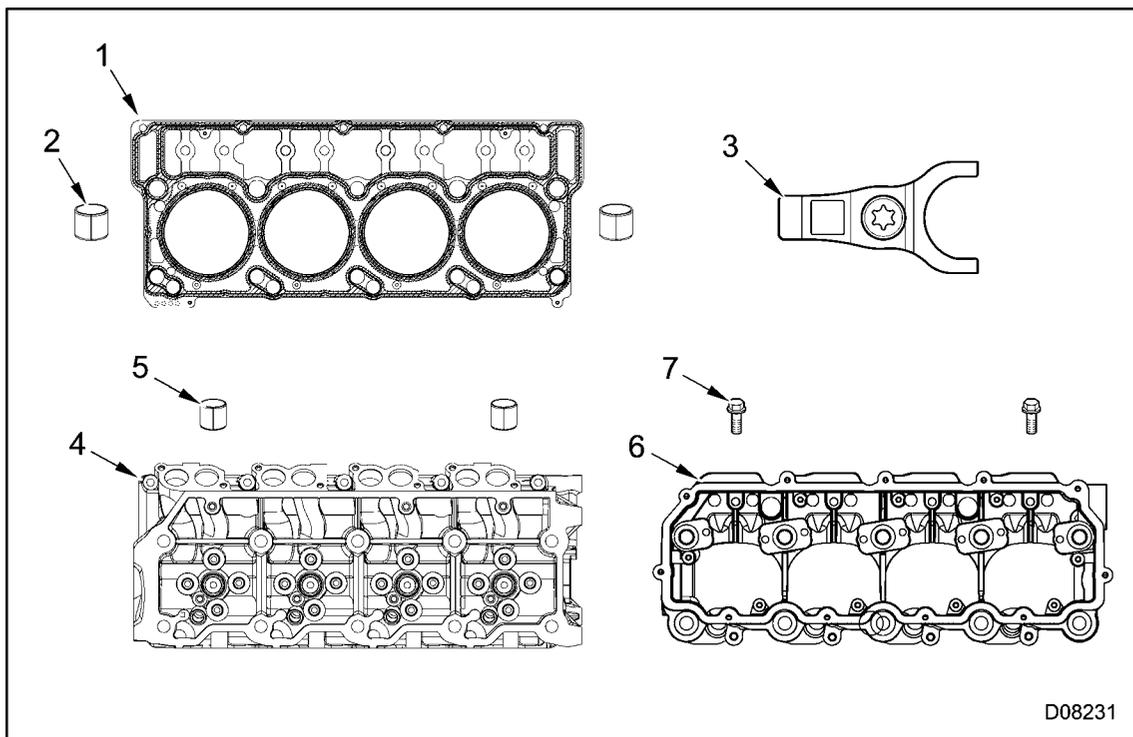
2005 Model Year (two M8 mounting bolts for rocker arm carrier)
